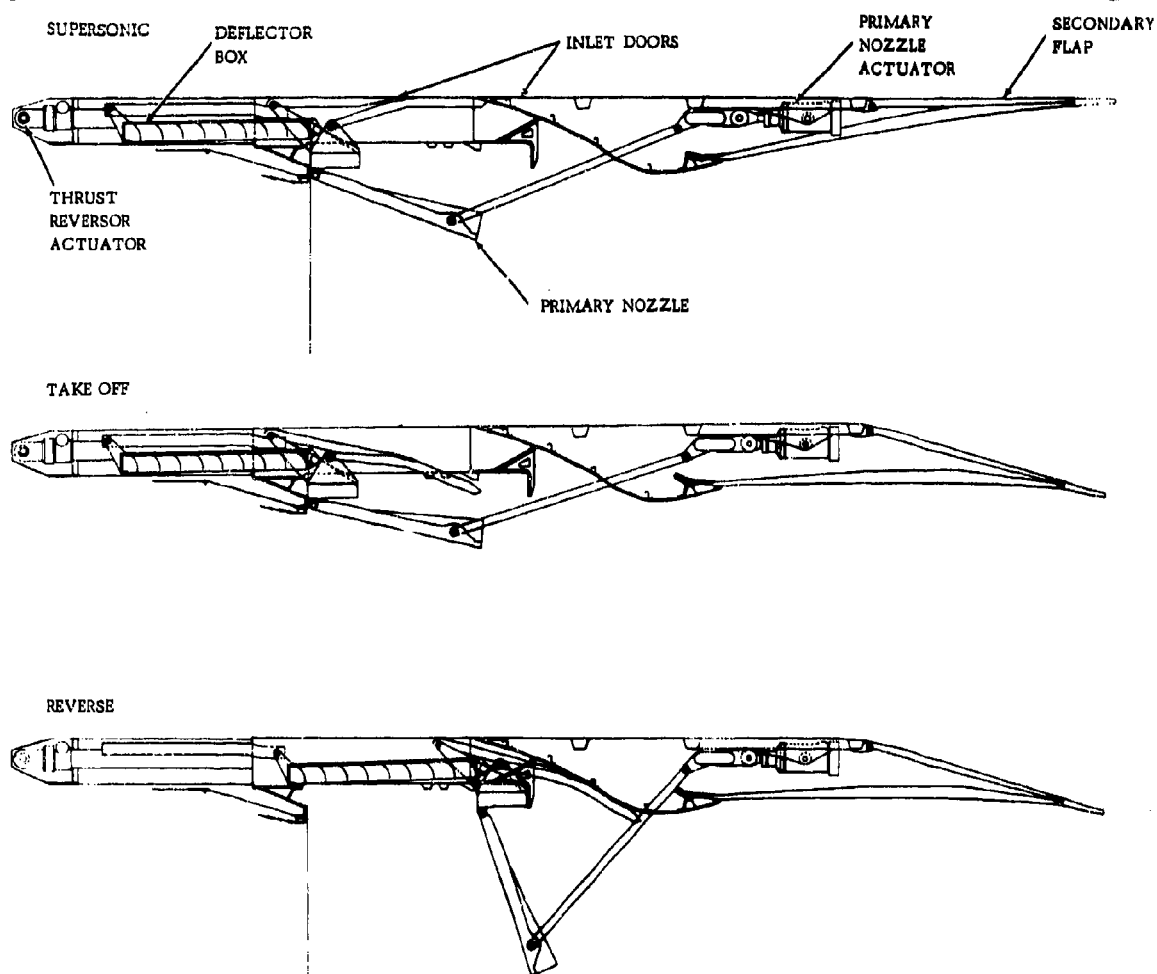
EXHAUST NOZZLE OPERATING MODES
